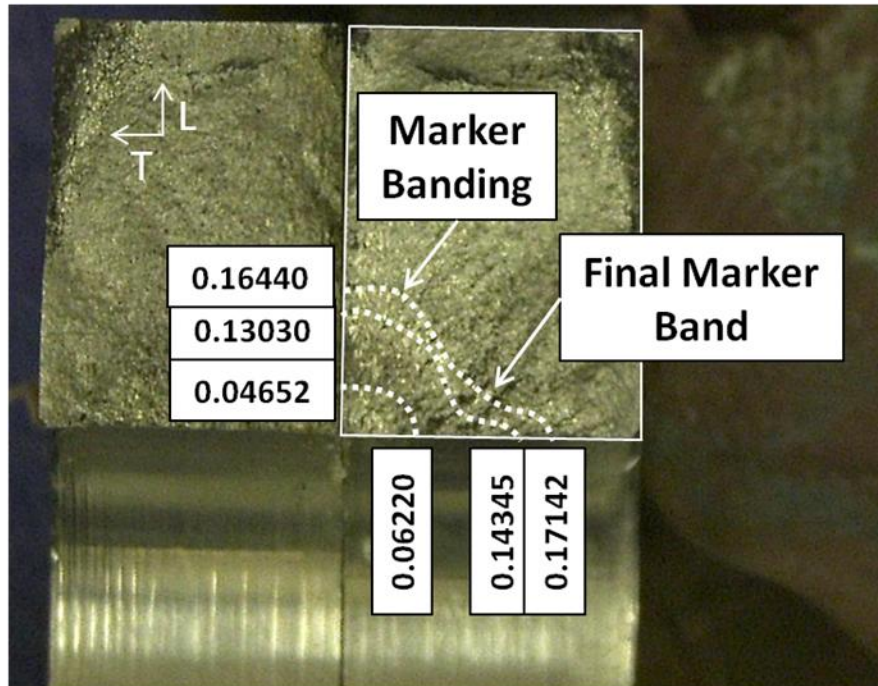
OFF-PC-CX2024-7 marker band specimen showing p-shape crack front
